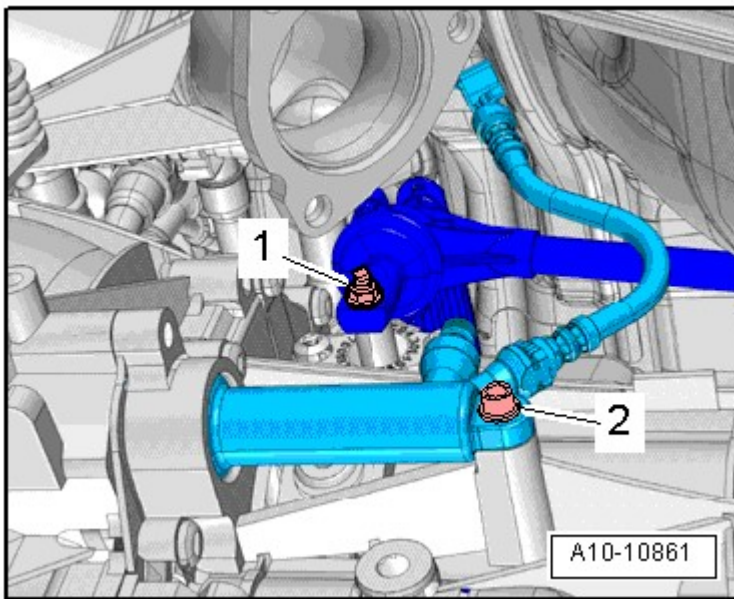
Identifying Bolt And Clutch Slave Cylinder Secured Sideways In Engine Compartment
